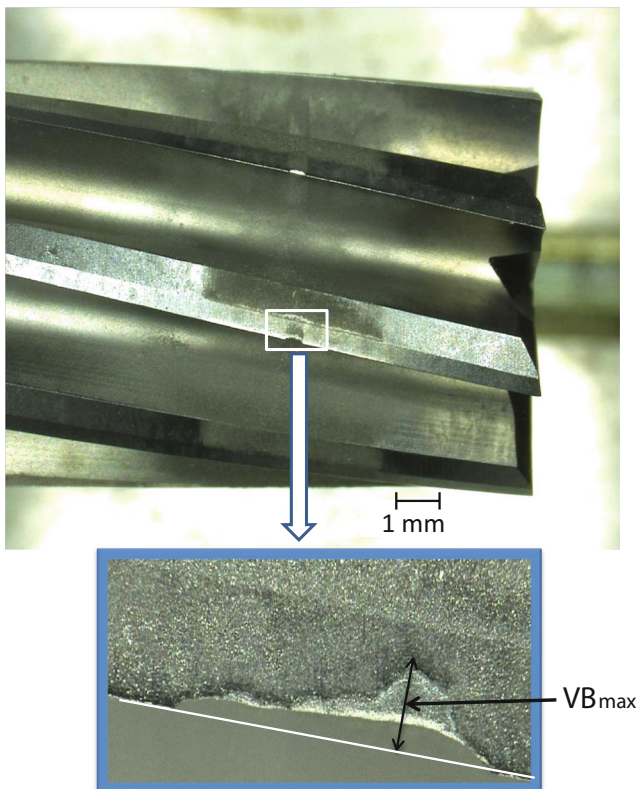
Measurement of tool wear ( $VB_{max}$ )
